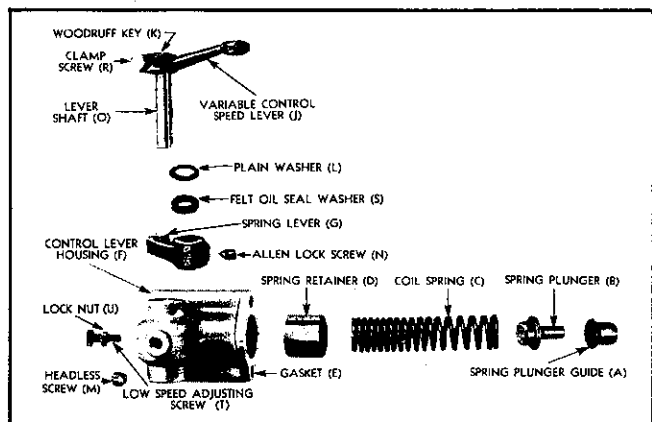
Variable Speed Governor Control Housing Spring and Lever Details.
